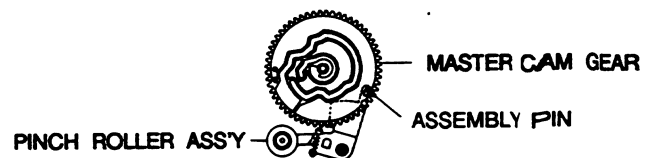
Pinch Roller Assembly and Master Cam Gear Assembly
